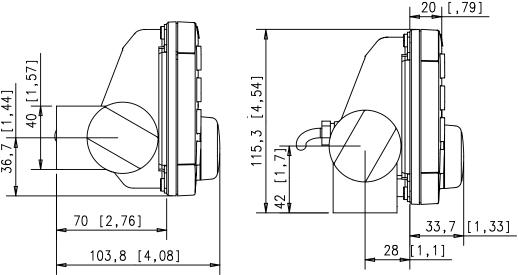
AP26 Control Unit – dimensions (Mounting bracket is optional equipment)
